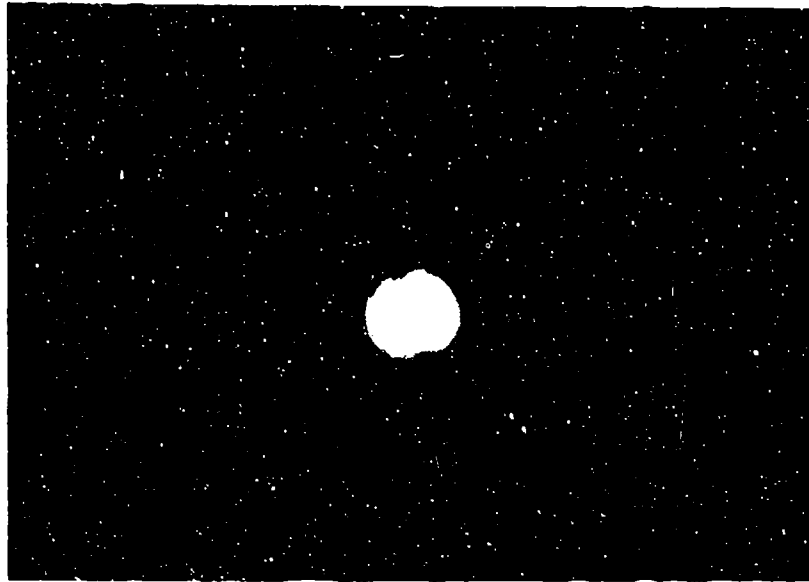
Rockwell Flaw Criticality Study Defect 39: Burned Drilled Hole
